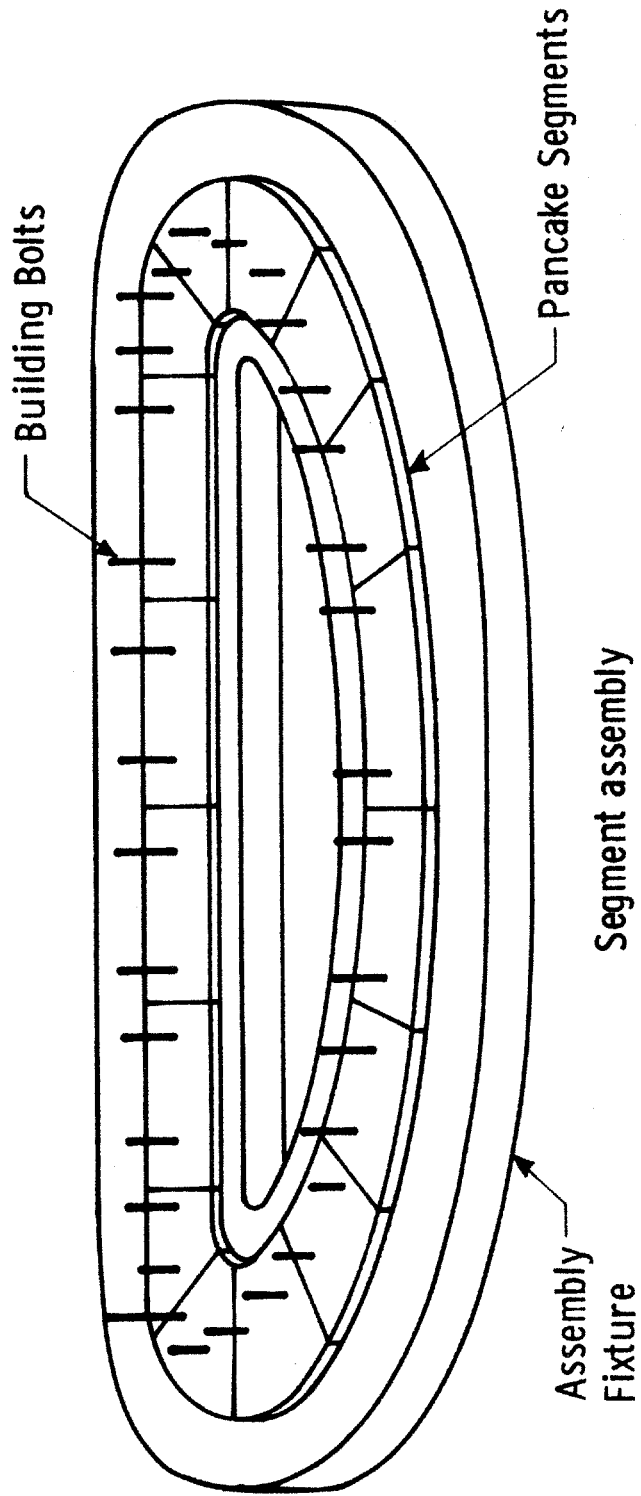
Schematic of Segment Assemble on Assembly Fixture
